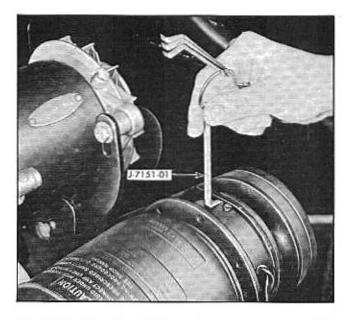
Checking Air Gap-Pontiac and Tempest V-8
